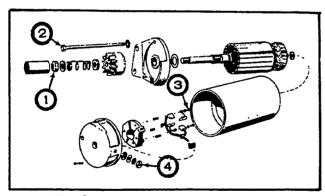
A. STARTER DISASSEMBLY (SPEC. B)
